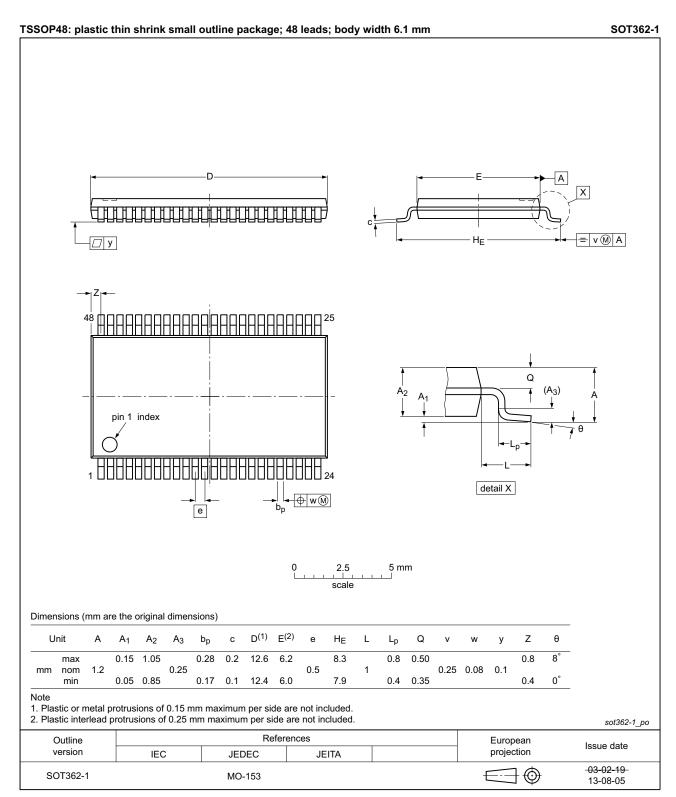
Package outline SOT362-1 (TSSOP48) of PCA85262ATT
